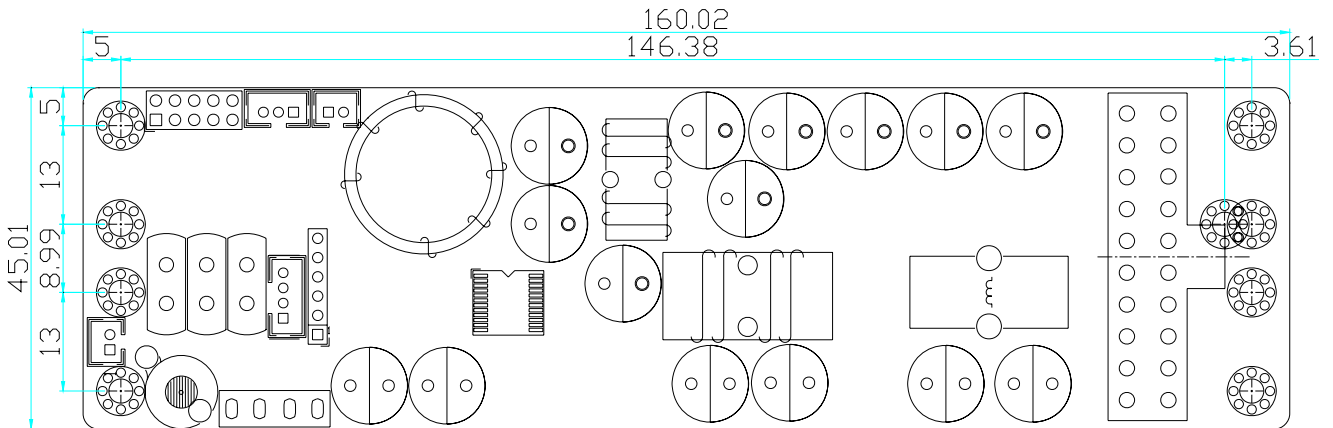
IDDV-6304140A Dimension Drawing (measurement units: millimeter)
